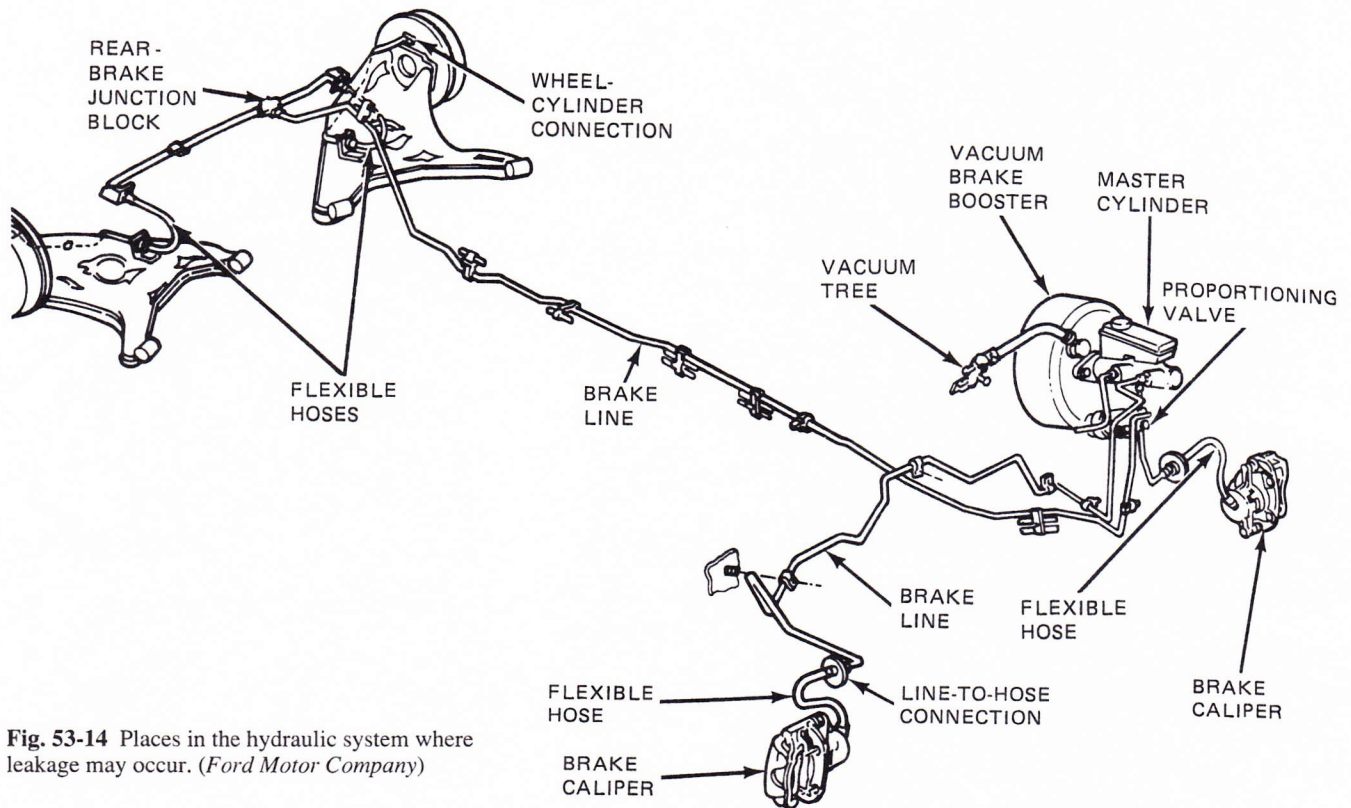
Places in the hydraulic system where leakage may occur. (Ford Motor Company)
